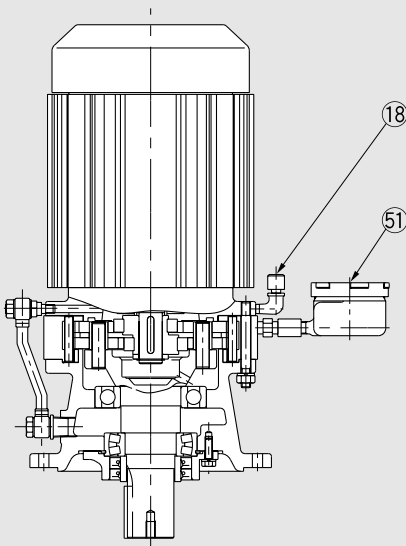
Type CVVM (Vertical Gearmotor)
